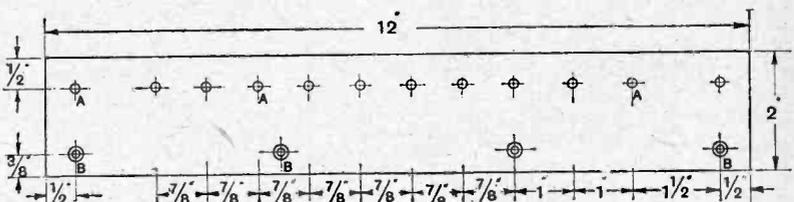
The terminal strip A = 4 B.A. clearance holes; B =  $\frac{1}{8}$  in. dia.
